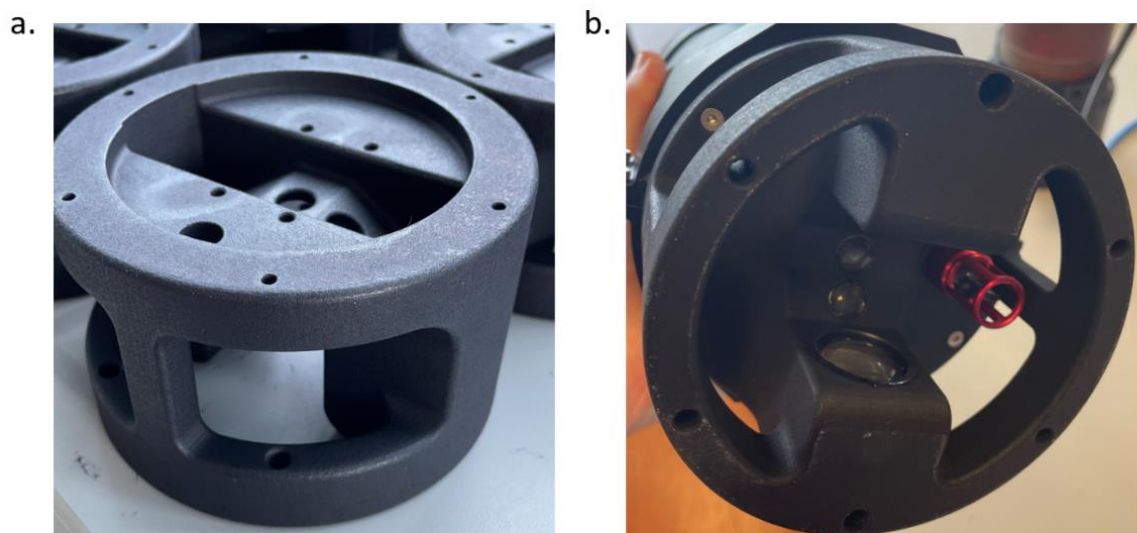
(a) SLS 3D printed nylon PA2200 optical head dyed black and infiltration water proofing post processing. (b) Assembled SLS printed optical head with lenses and probe installed.
